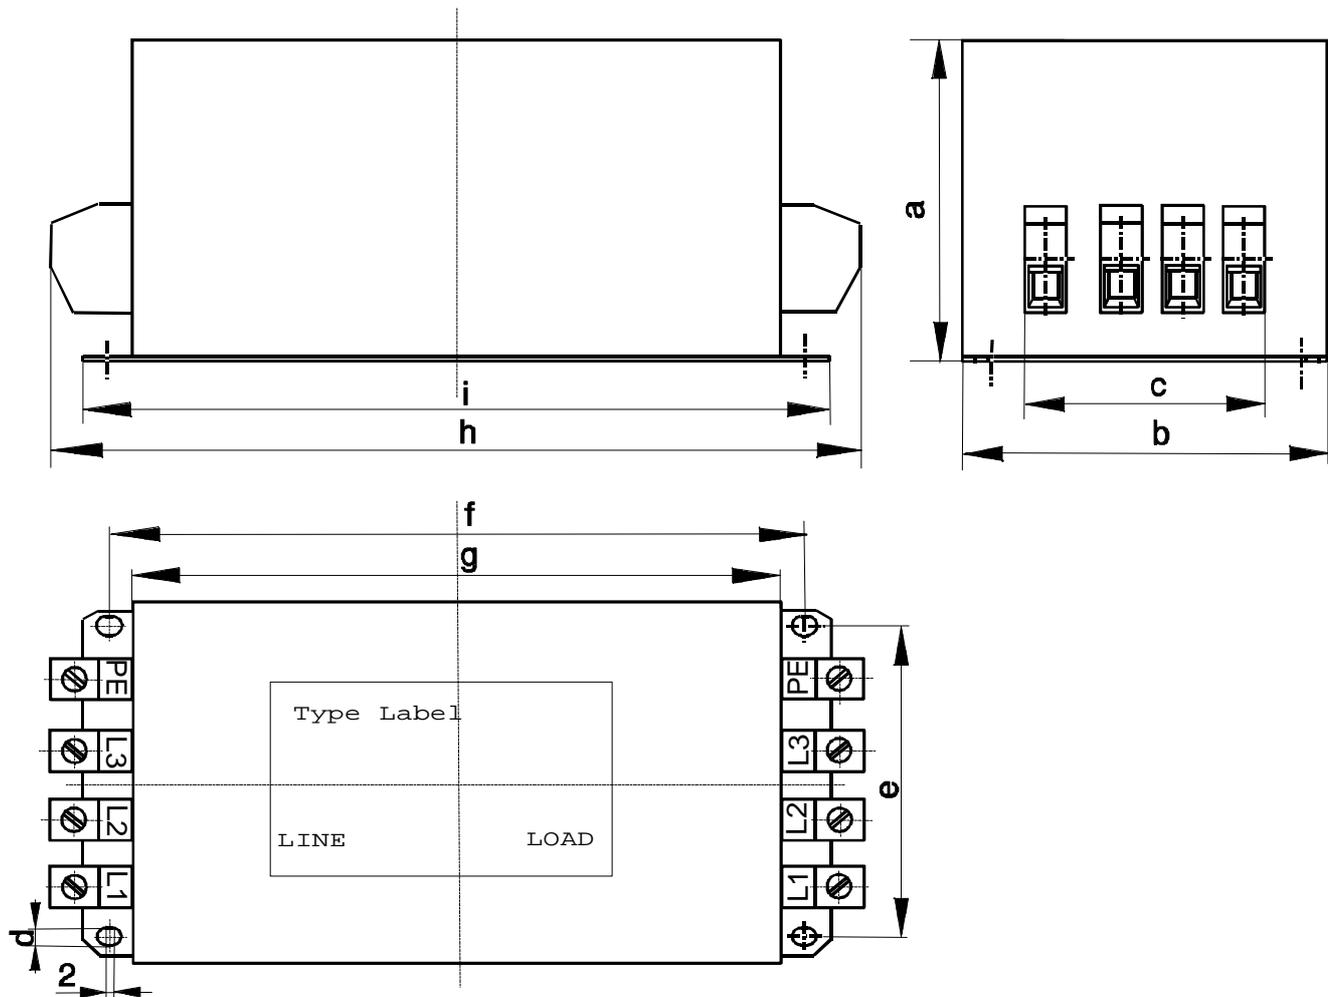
Dimension Drawing EMC filter, sizes A to D
